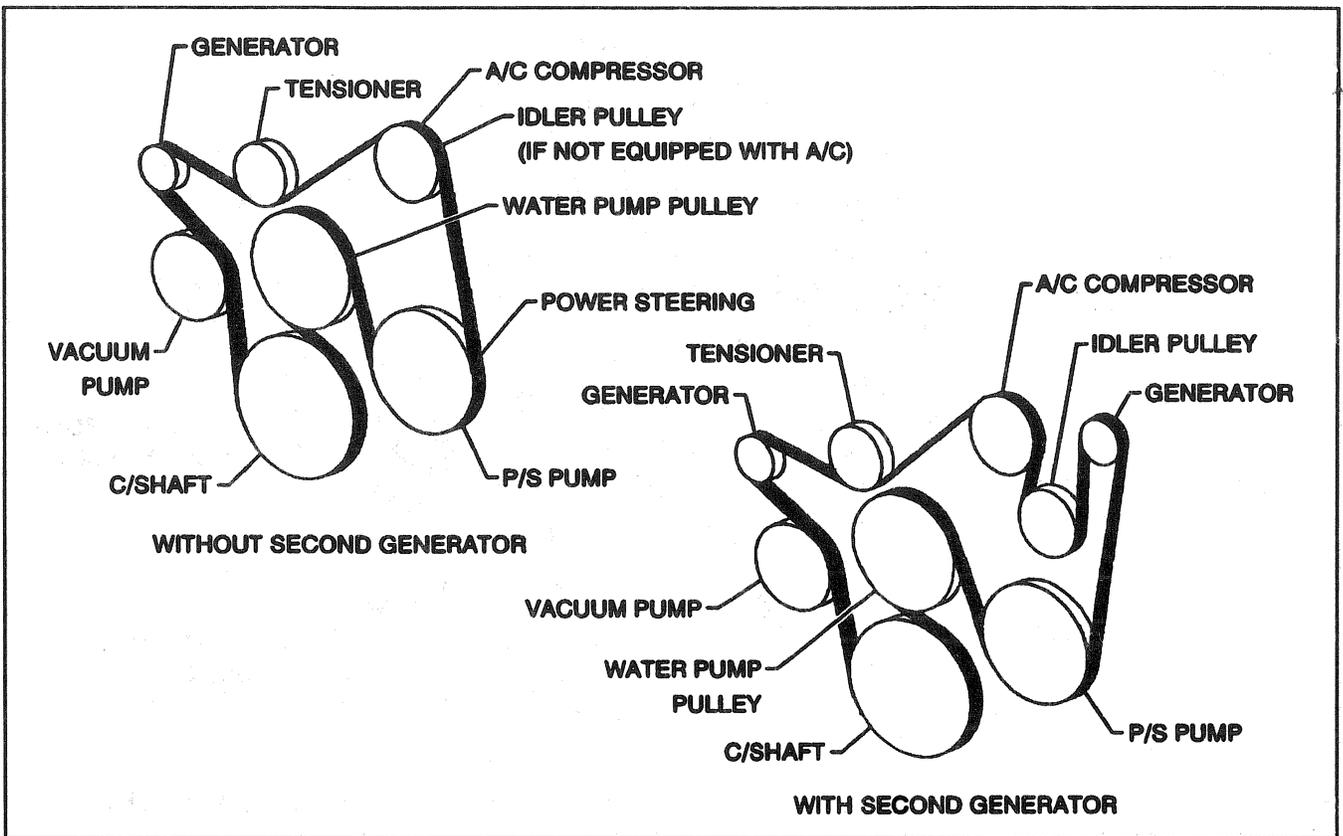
Multiple Rib Drive Belt Routing (Diesel Engines)
